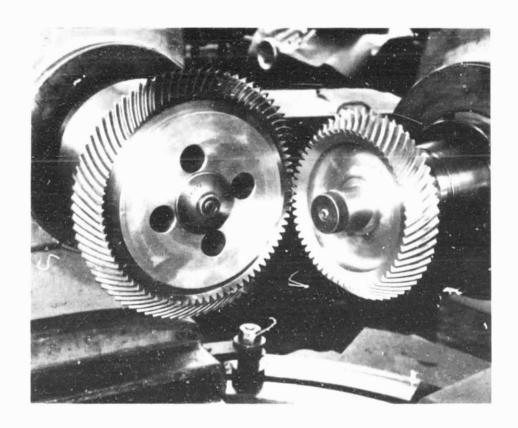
Compressor Intermediate Case Towershaft Bevel Gears
